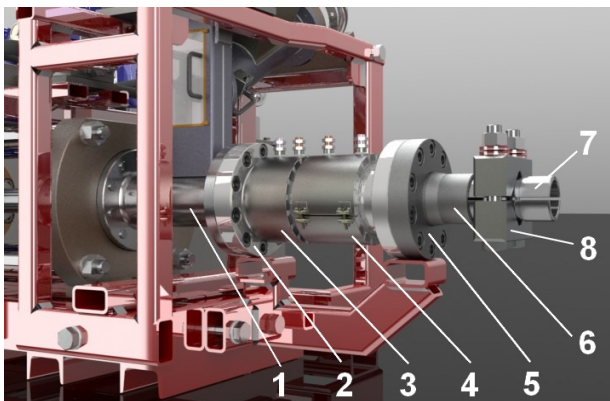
Pressing chamber of experimental pressing stand (1 – pressing chamber; 2 – socket; 3 – heating equipment 1; 4 – heating equipment 2; 5 – flange; 6 – sleeve; 7 – collet; 8 – jaws) [5]
